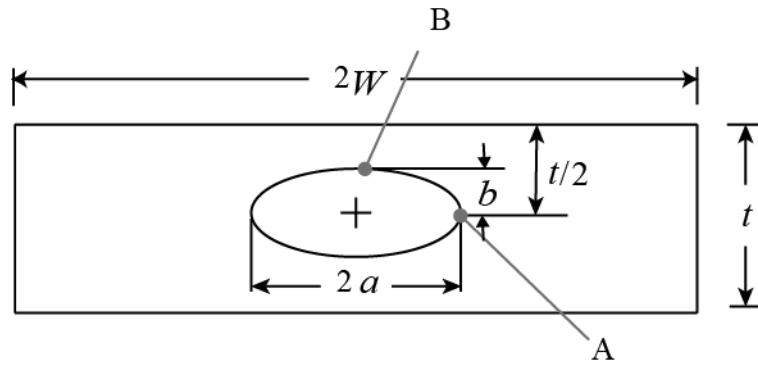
Embedded elliptical crack in a thick welded joint.
